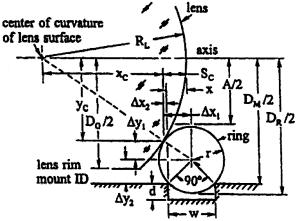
Design geometry for constraining a convex surface with a cut circular cross-section snap ring.
